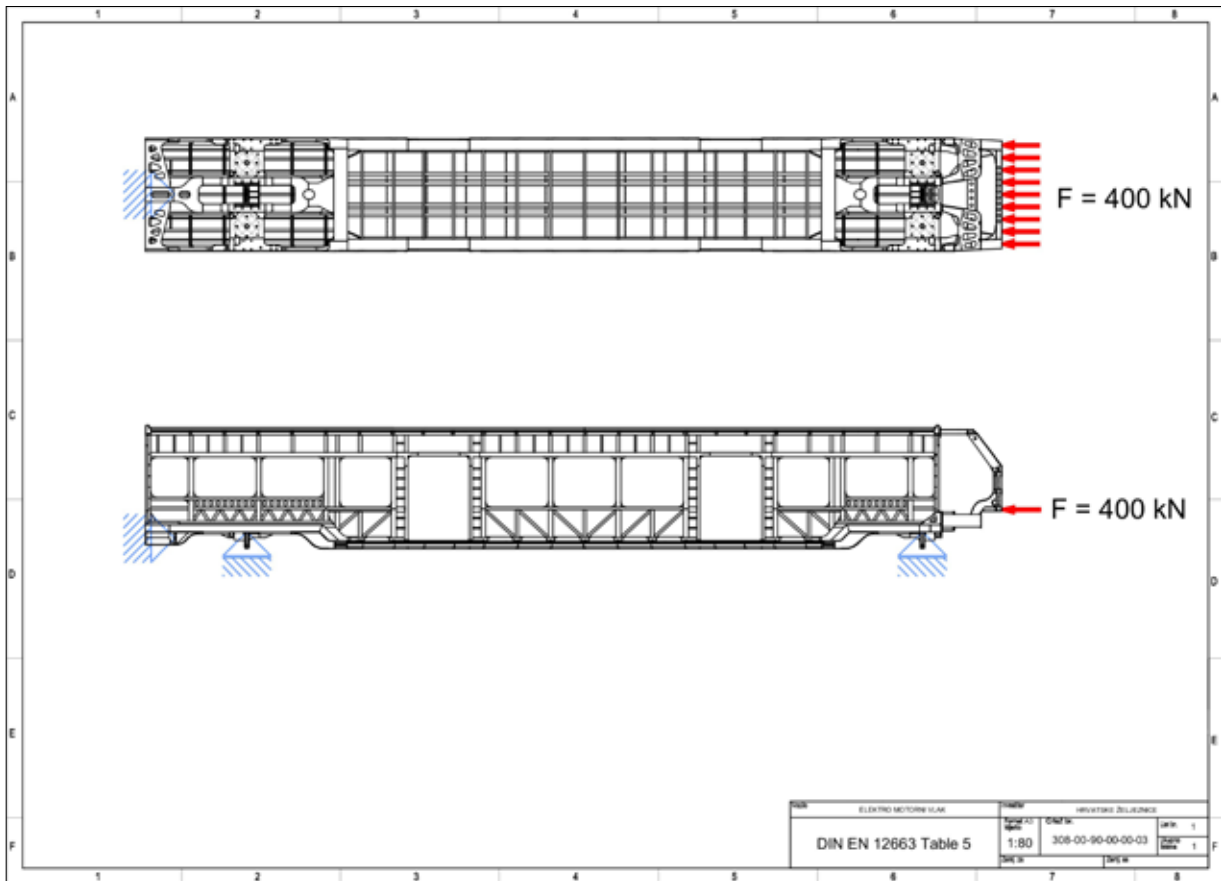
Compressive force 150 mm above the top of the structural floor at head stock
